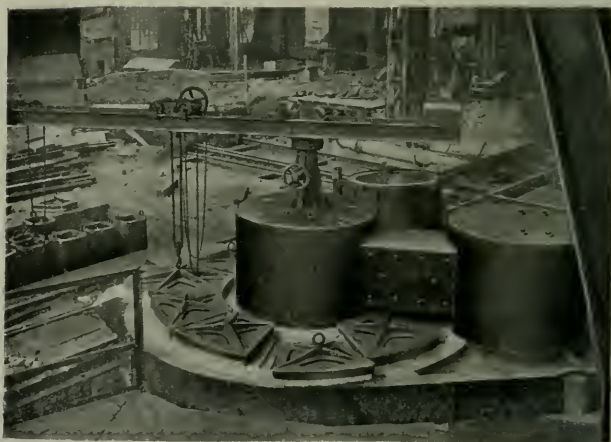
Top view of same, showing covered groove containing the melted metal.
